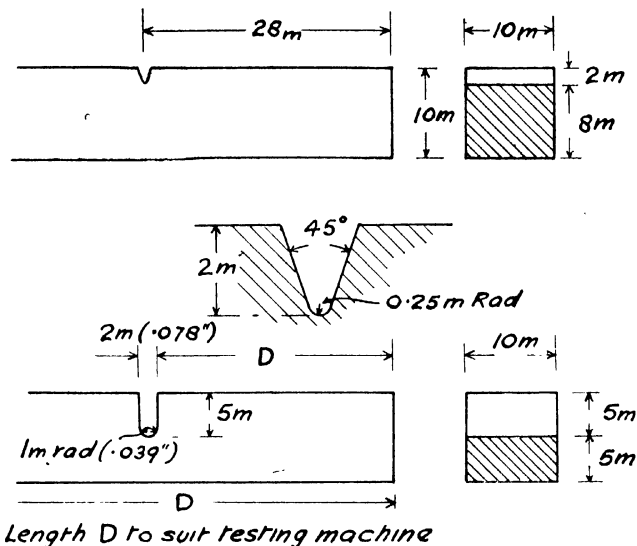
STANDARD NOTCHED BARS FOR IMPACT TEST.
